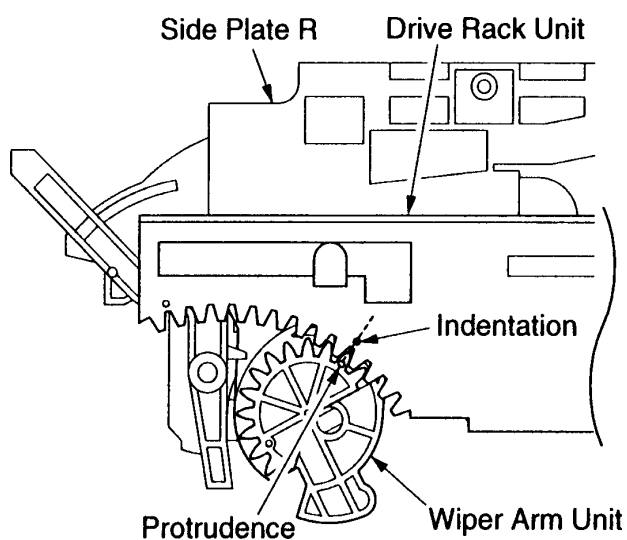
Top Plate/Wiper Arm Unit/Holder Unit Disassembly
